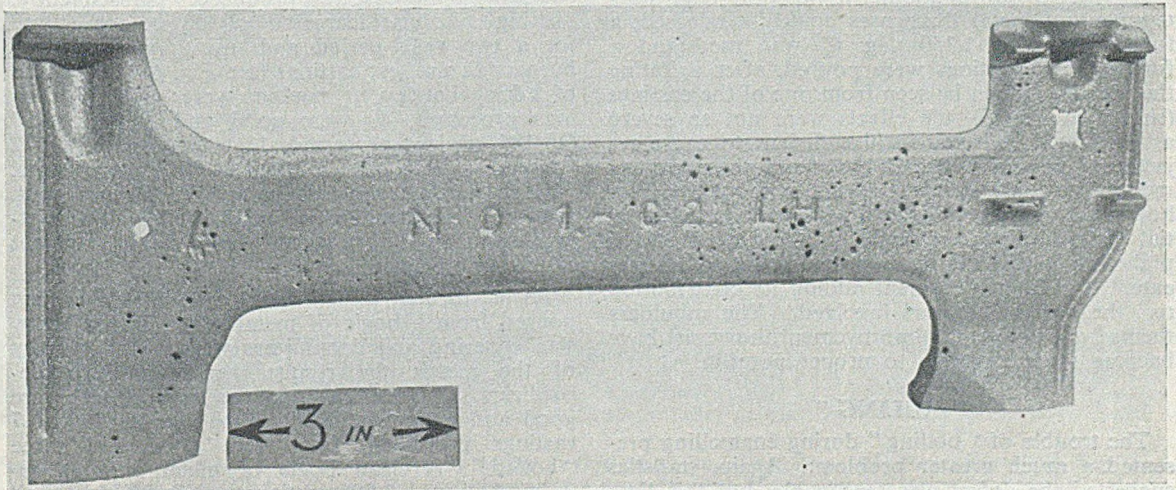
Example of an Enamelled Casting showing the Pinhole Defect.
